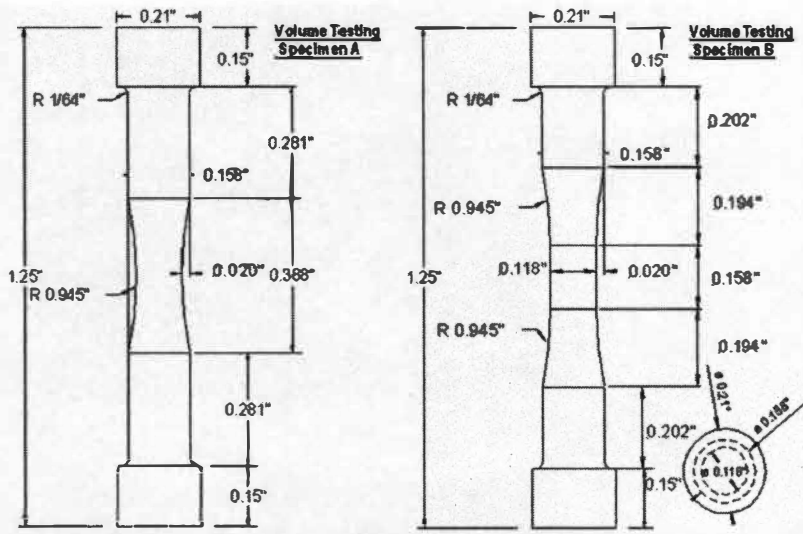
Volume / Surface Area Specimen Geometries for Uniaxial Fatigue Testing. The Radial Taper in Both Geometries Are the Same. However, Geometry B (on the Right) Has a Cylindrical Testing Section, and Geometry A (on the Left) Has Its Testing Section on a Single Plane.
